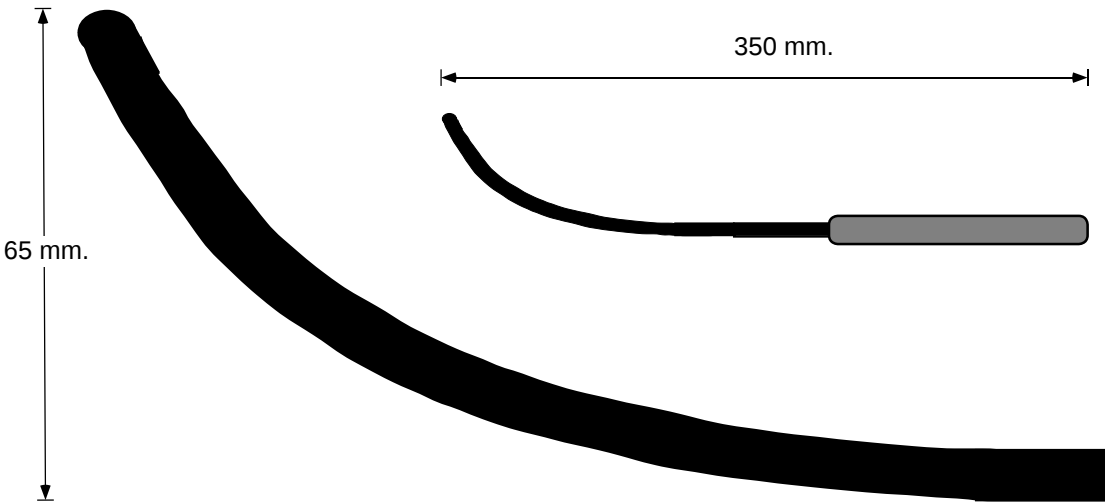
Shape of the curved part of the bending iron. Actual size.
